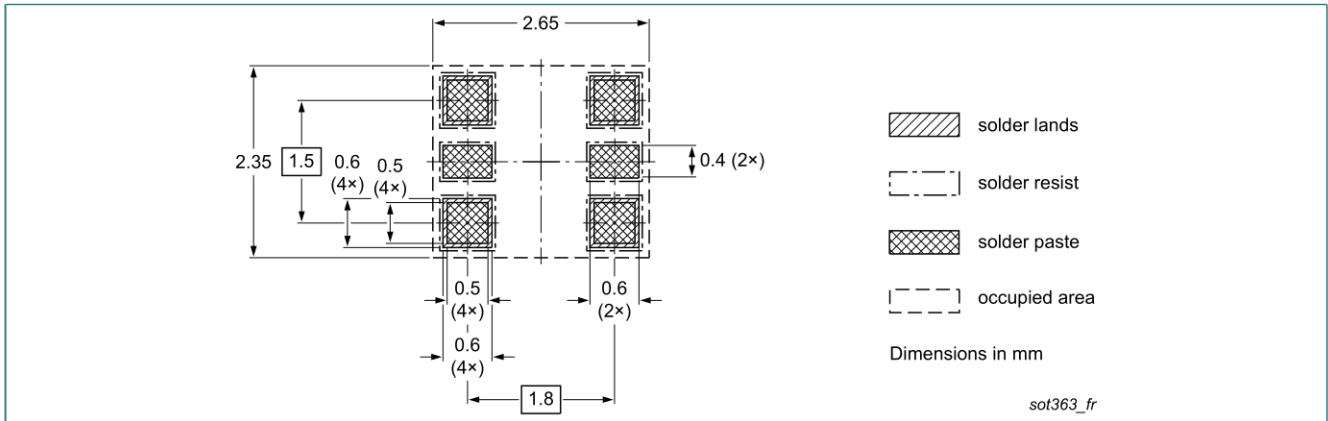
Reflow soldering footprint for TSSOP6 (SOT363)
